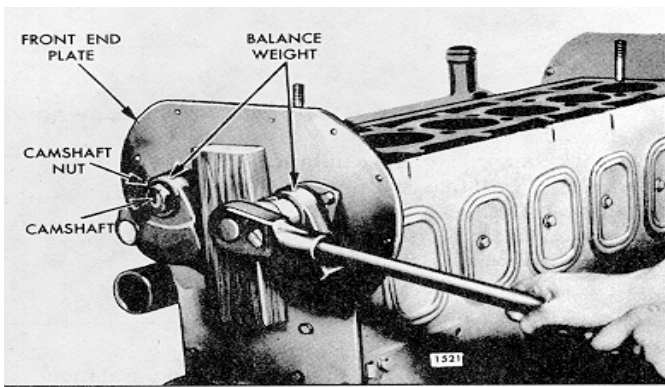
Loosening Nut on Camshaft or Balance Shaft
